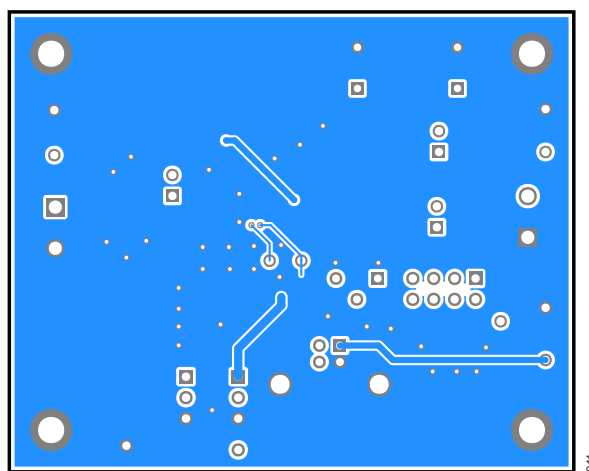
ADPL86612 EV Kit PCB Layout—Bottom Layer
